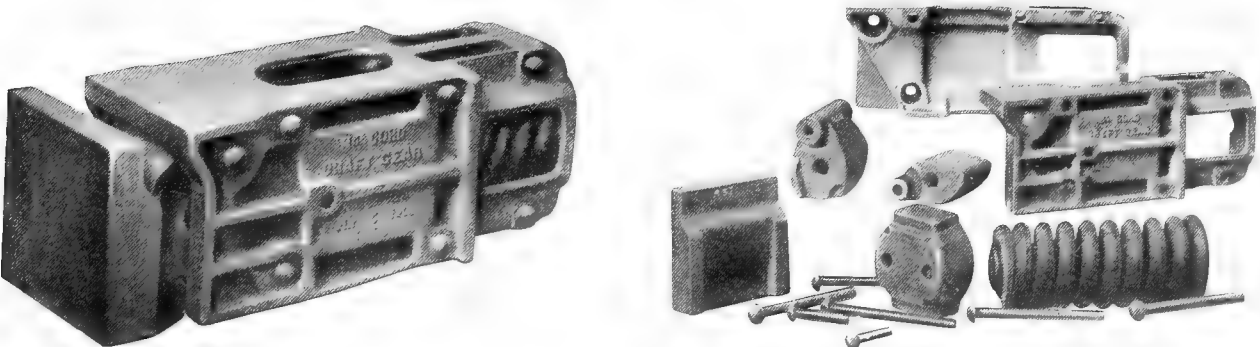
McCord Draft Gear, Type D. McCord & Company.
